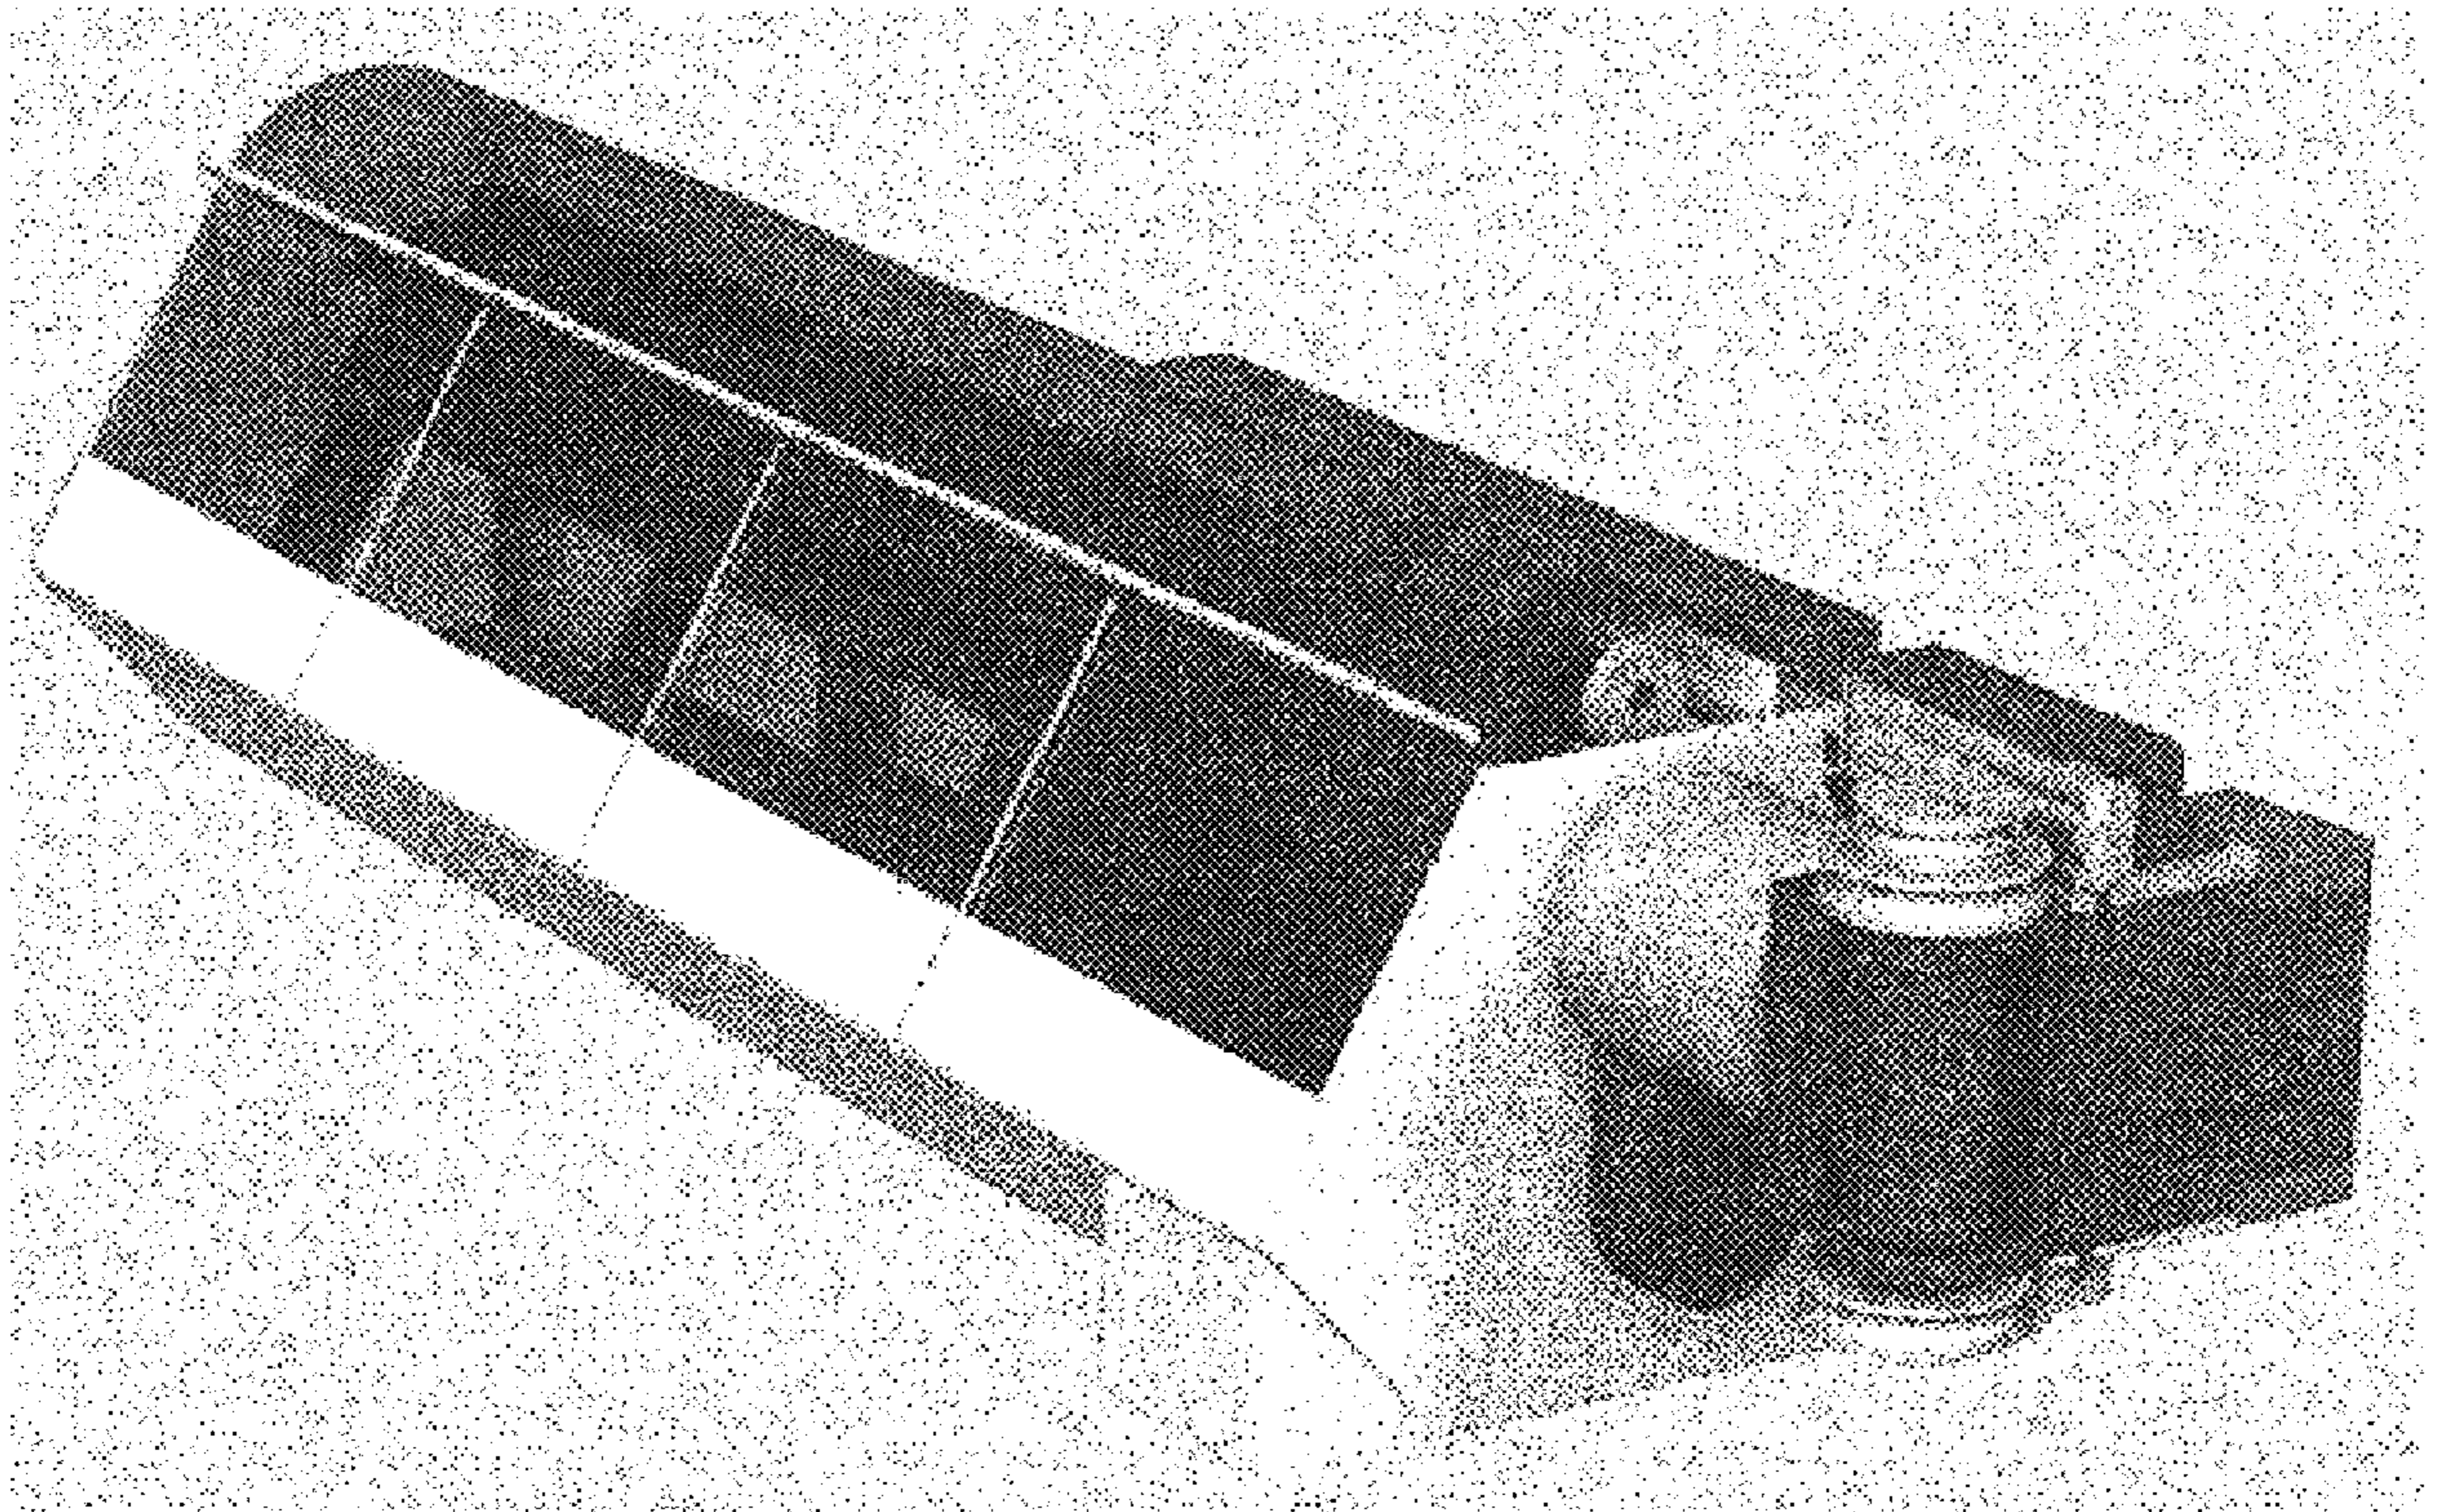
is a perspective view of the machine of FIG. 1 as seen from the other end;
